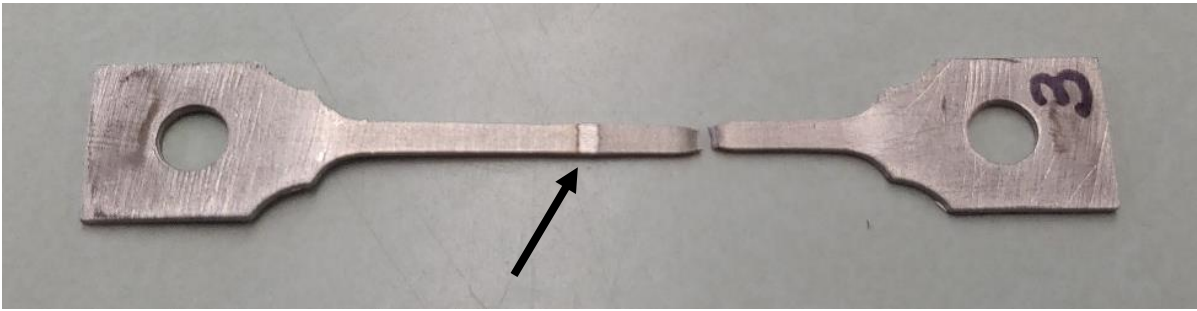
Welded specimen 3 after tensile test – rupture outside of weld area. The arrow indicates the weld joint.
